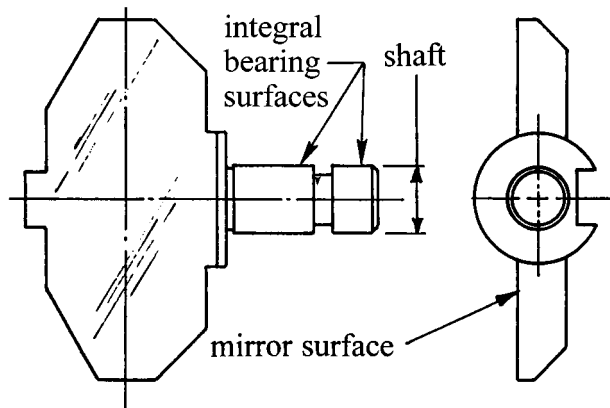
Metal mirror subassembly with integral gimbal axis fabricated by SPDT techniques. (Adapted from Addis, E.C. 1983. *Geometrical Optics, SPIE Proc. Vol. 389*, Taylor, W.H., ed., p. 36.)
